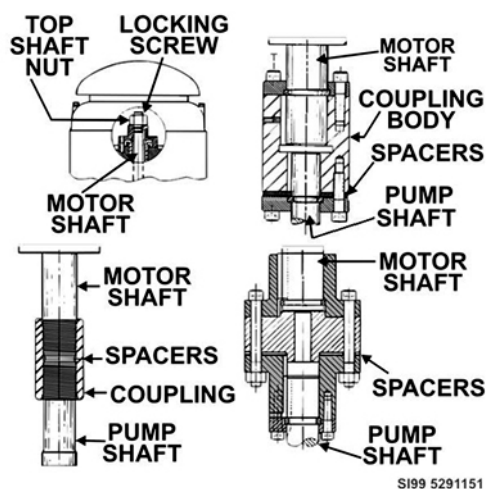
VHS motor and motor-to-pump shaft couplings.
